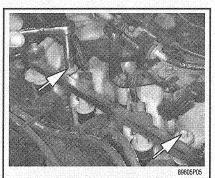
Remove the fuel rail assembly retaining bolts. There are two on each side of the engine
